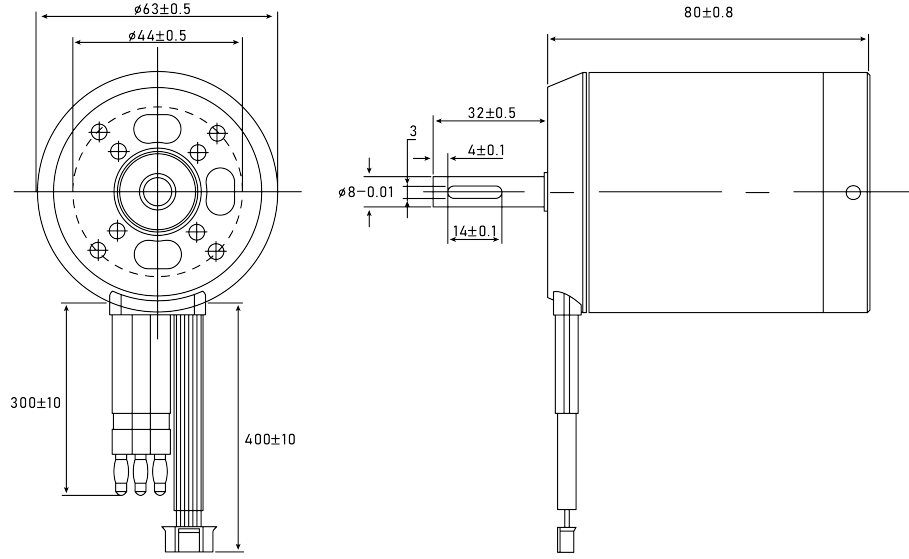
TORQUE BOARD 6355-190KV dimensions.
